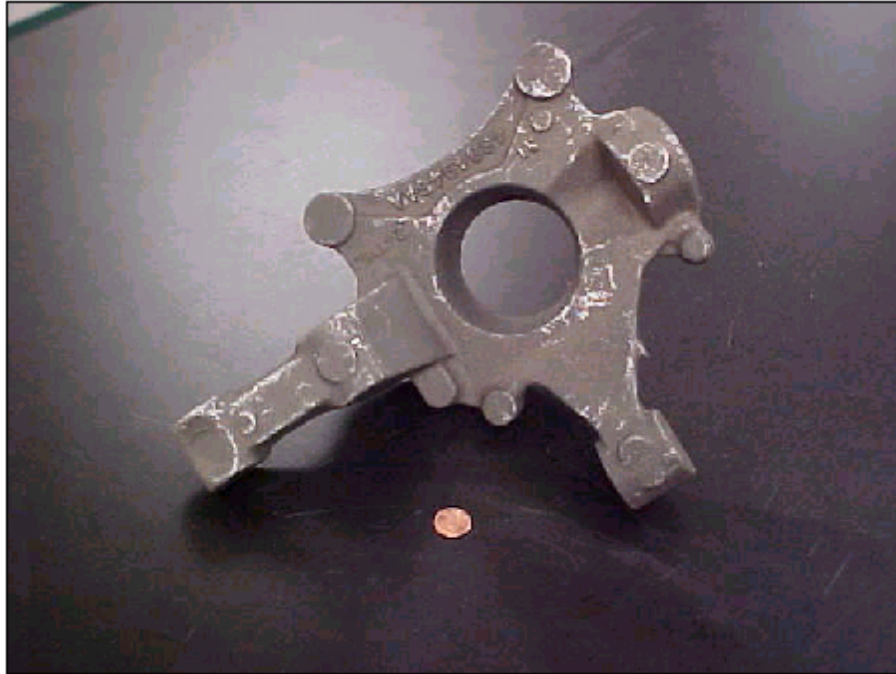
Commercially produced sand-cast Sr-modified A356 steering knuckles shown next to a penny to indicate scale. This casting represents the third industrial casting used to test the effects of the combined Densal[®]/solution heat treatment process.
